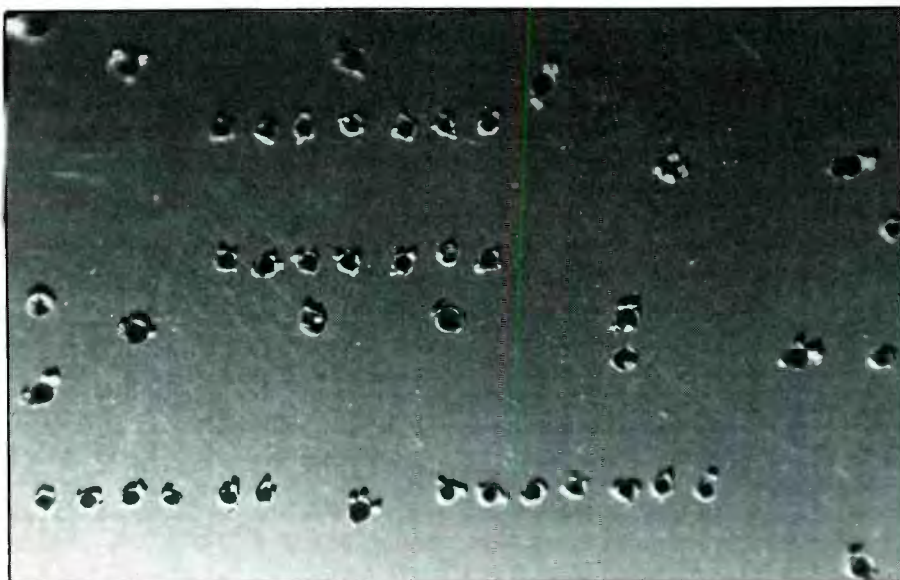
Sharp copper edges will appear on the exit side of holes drilled through double-sided pc blank. These must be smoothed with very fine emery cloth.
